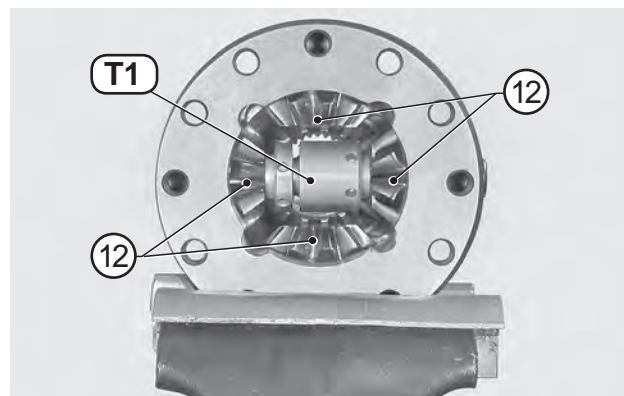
Remove press tool T3A (See drawing T3 p. 141) and bushing T2 (See drawing T2 p. 140).
